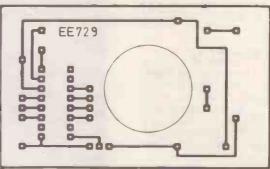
Printed circuit board component layout and full size copper foil master pattern.
